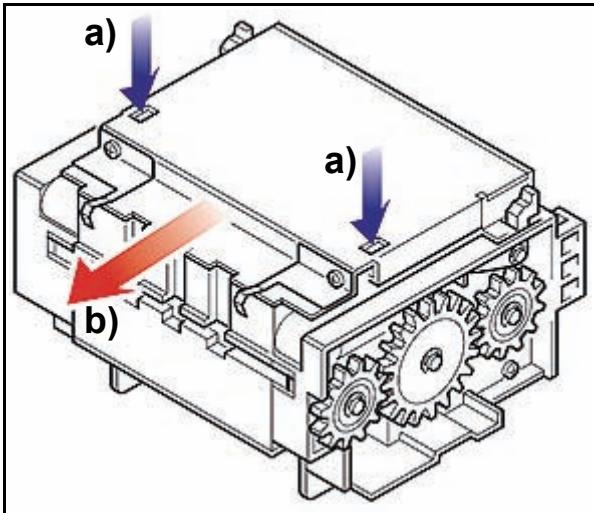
WBA Acceptor's Upper Sensor Board Cover Removal
